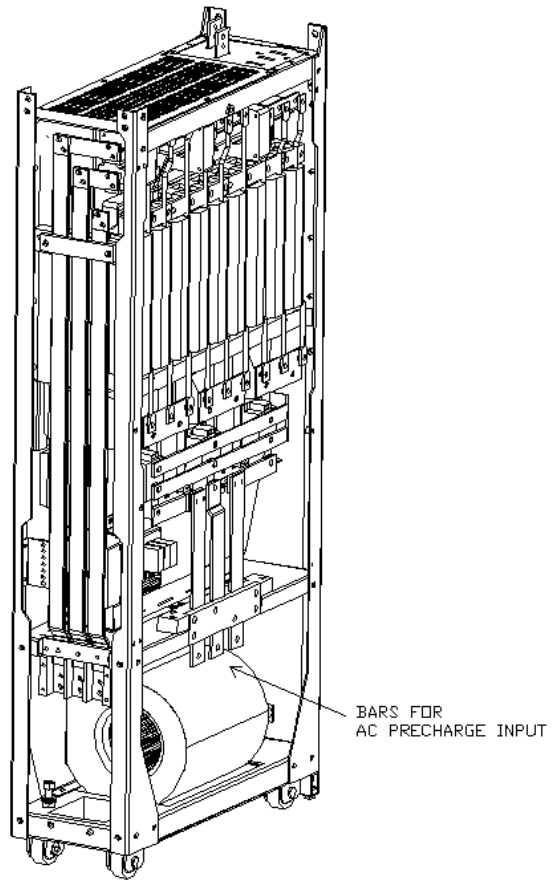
AFE 3D drawings – Precharge AC INPUT
